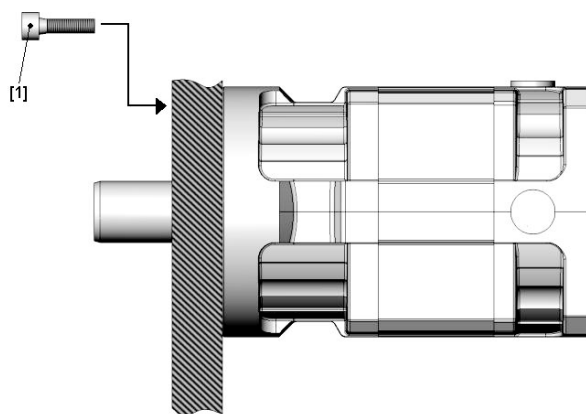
Installing the PS.CZ.. planetary servo gear unit in the machine
